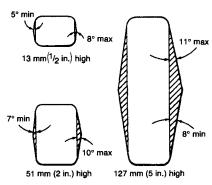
Effect of part size on the amount of metal needed for draft in a forging
